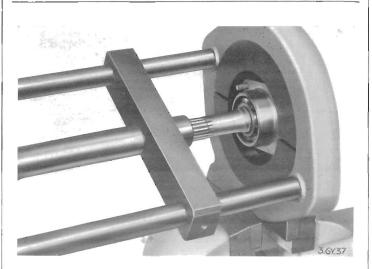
Using Churchill press and adaptor set S4221A-7 to press the inner axle shaft from the bearing
